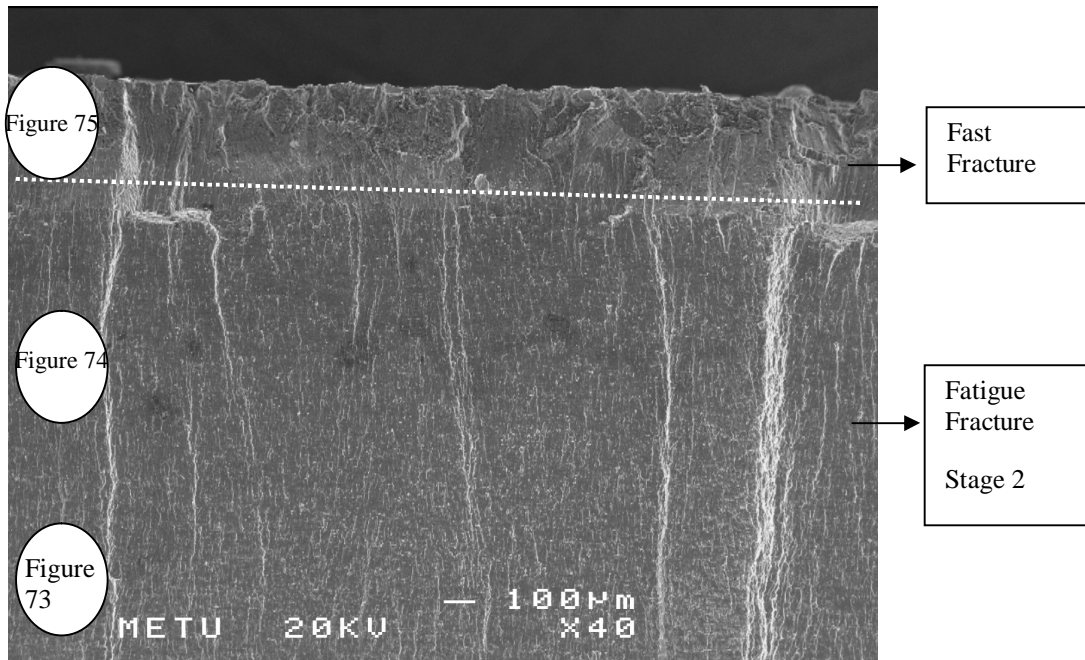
Dynamic Loading Specimen Fracture Surface (Location of the images)
